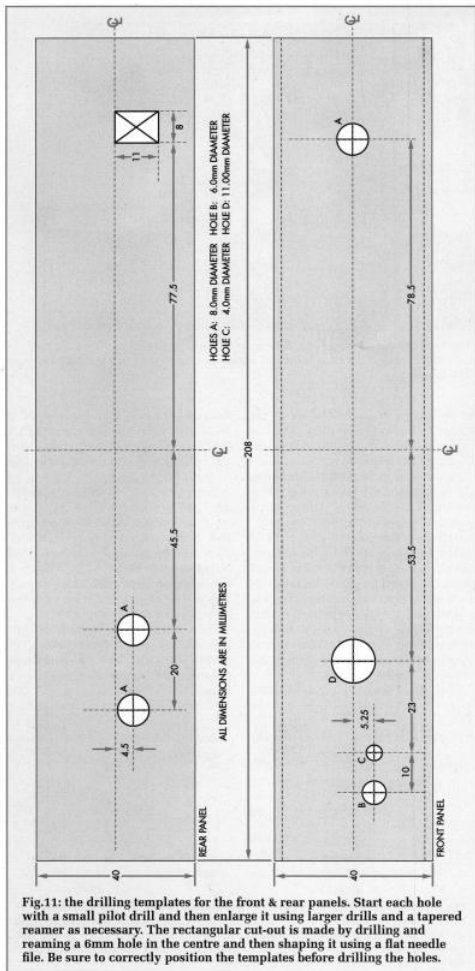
the drilling templates for the front & rear panels. Start each hole with a small pilot drill and then enlarge it using larger drills and a tapered reamer as necessary. The rectangular cut-out is made by drilling and reaming a 6mm hole in the centre and then shaping it using a flat needle file. Be sure to correctly position the templates before drilling the holes.
